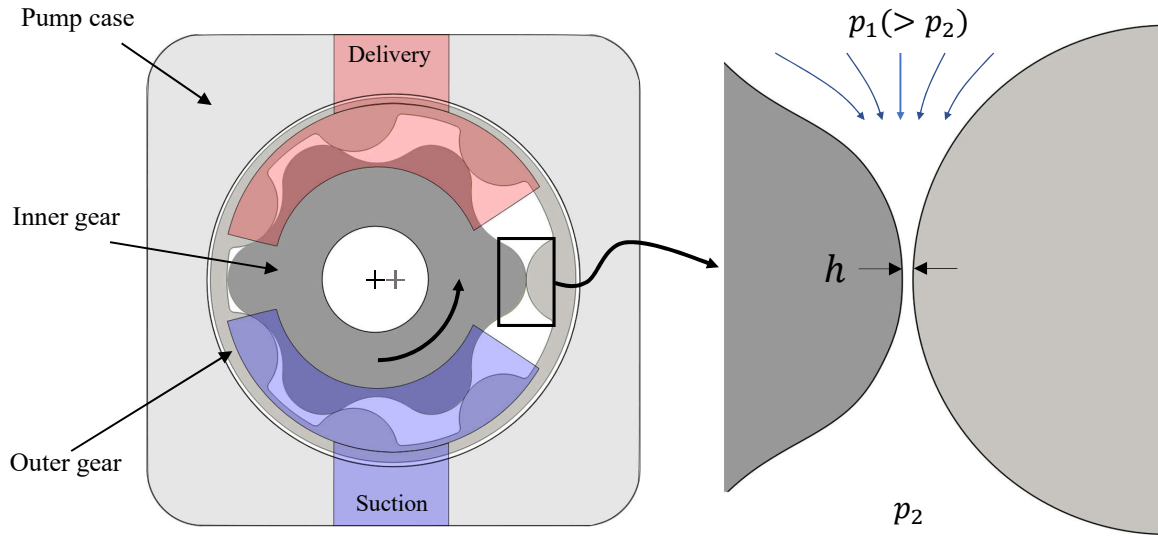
Components in a gerotor. The clearance between the gears is highlighted in the illustration on the right.
